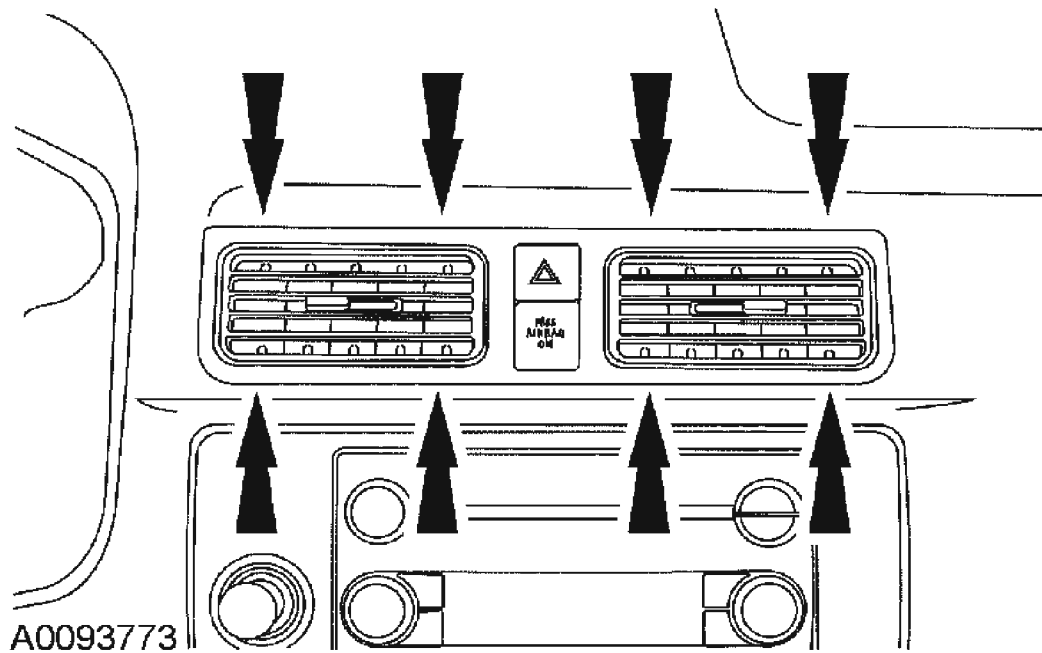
Removing Passenger Air Bag Deactivation Indicator (PAD)/Hazard Switch Assembly And Climate Control Registers
